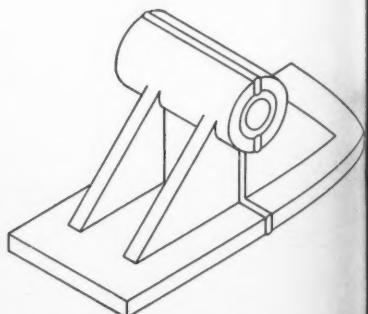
The $\frac{1}{8}$ -Inch Clearance Between the Halves was Filled with Bronze, Then the Halves were Sawed Apart after Threading
